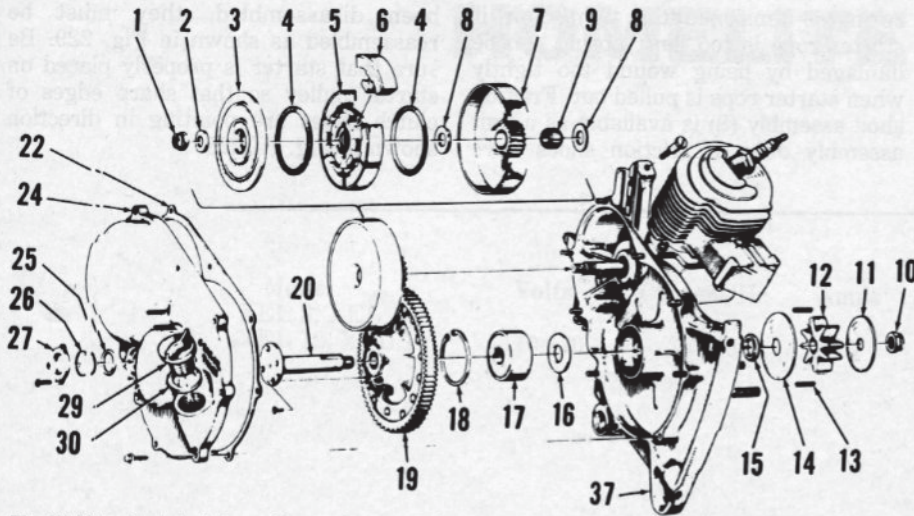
Exploded view of transmission. One standard and two optional gear ratios are available. Standard gear ratio of 3.57:1 is provided by output gear with 75 teeth and clutch drum with 21 teeth. Optional 2.84:1 ratio requires output (driven) gear with 71 teeth and clutch drum gear with 25 teeth. On 2:1 optional gear ratio, output gear has 64 teeth and clutch drum gear has 32 teeth.
